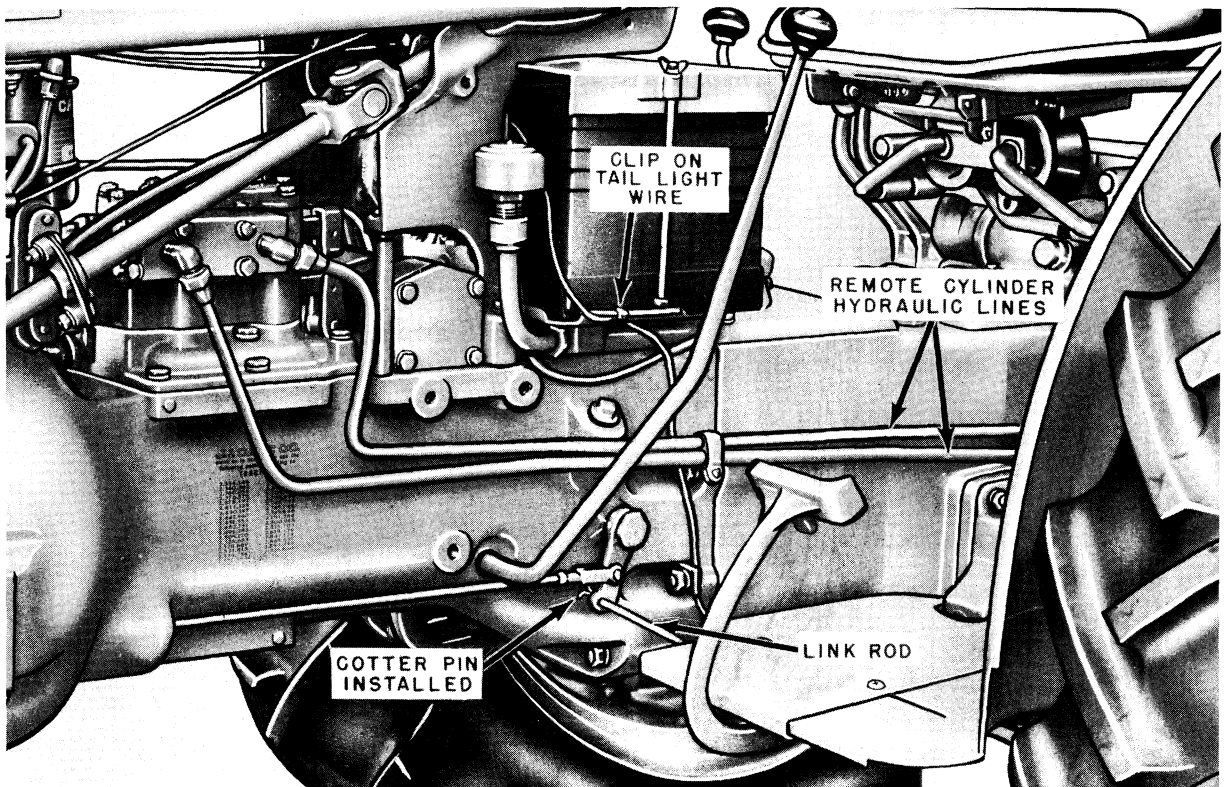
L.H. View Dry Clutch Tractor - All Parts Assembled to Tractor
